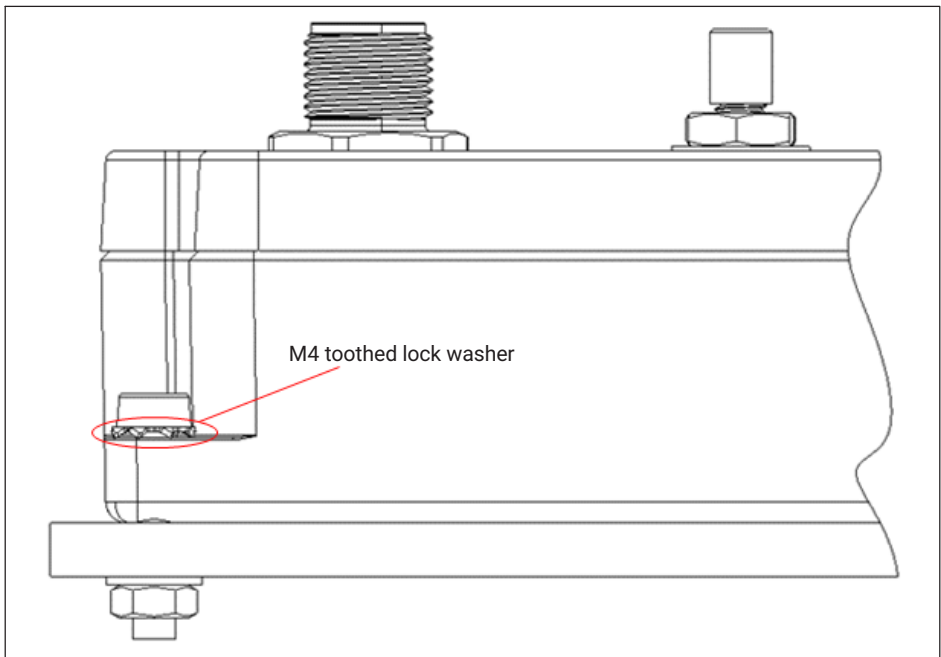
digiBOX housing mounting with M4 toothed lock washer
